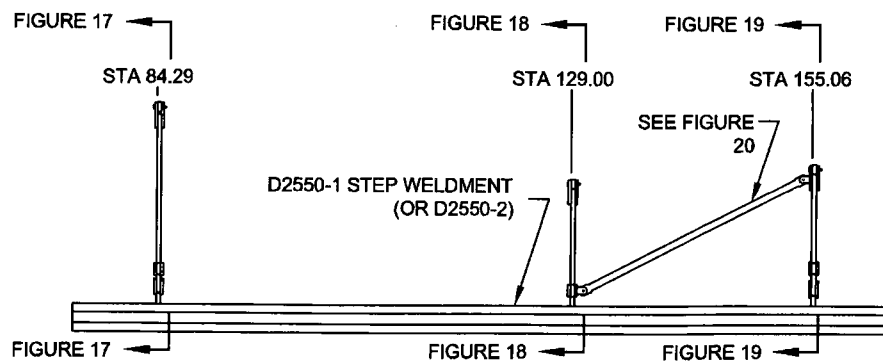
D412-630 Heli-Access-Step™ Installations
